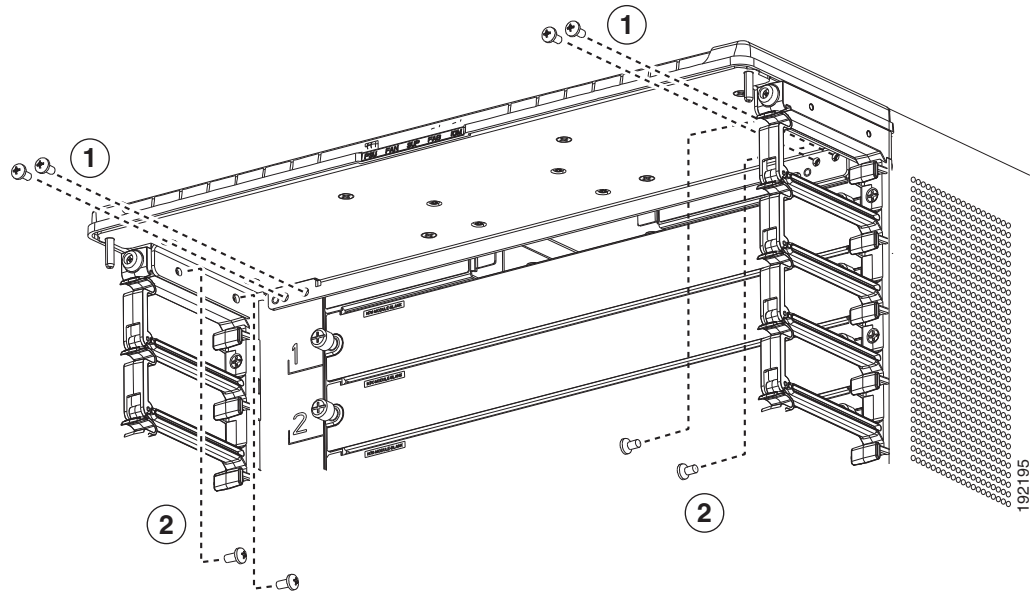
Positioning the Top Cover with the Upper Cable Management Assemblies and the Switch Chassis
